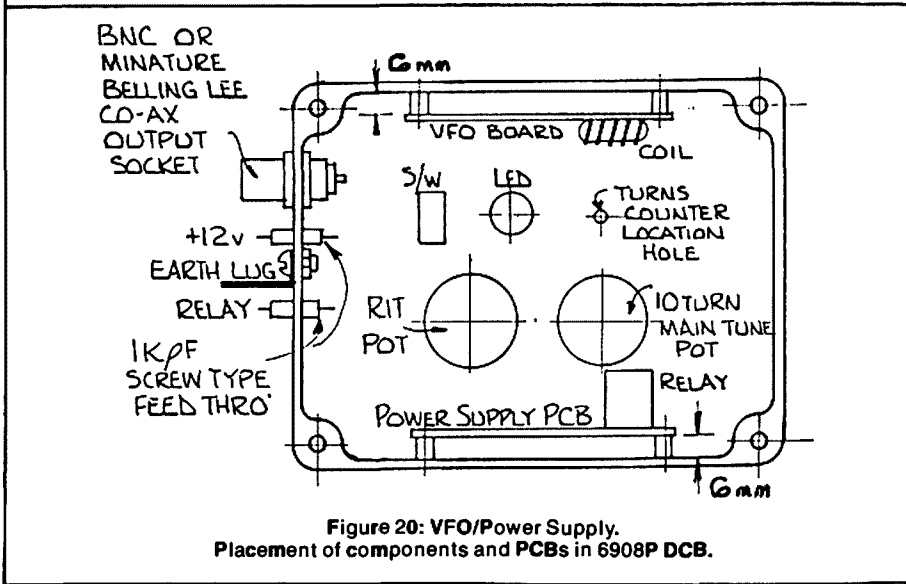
VFO/Power Supply. Placement of components and PCBs in 6908P DCB.
